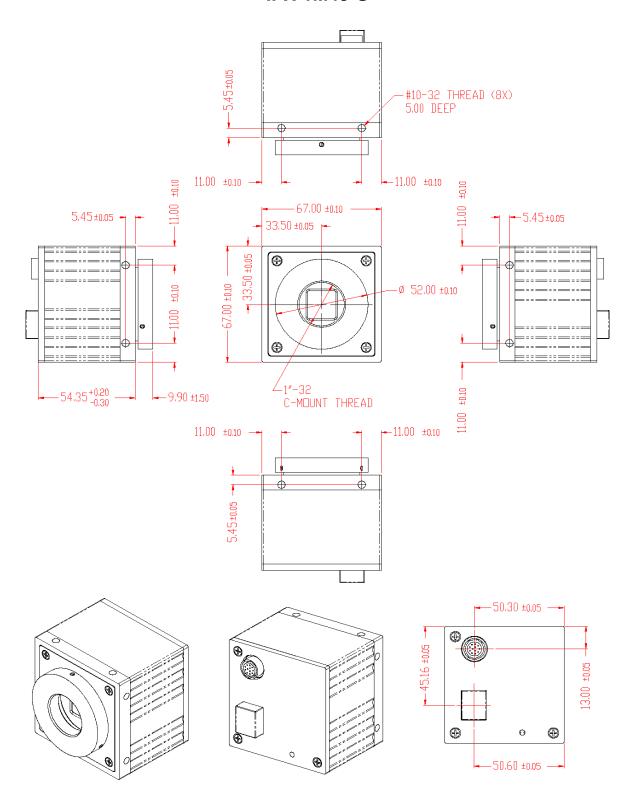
IPX-1M48-G (Silver Body) Dimensional Drawings
